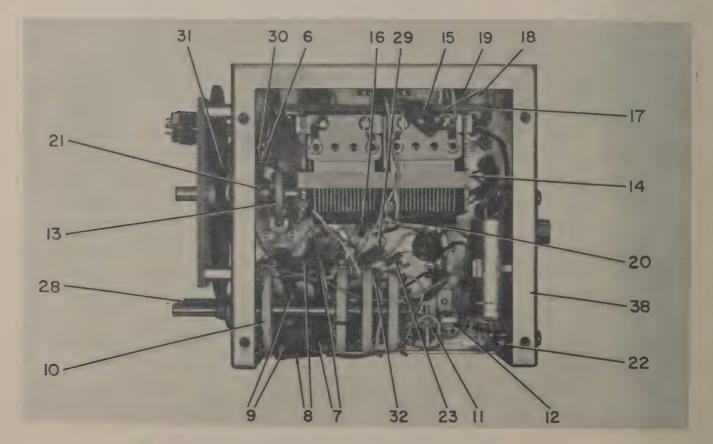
B. R-C Oscillator Chassis Assembly-Interior View (Sheet 1 of 2)
